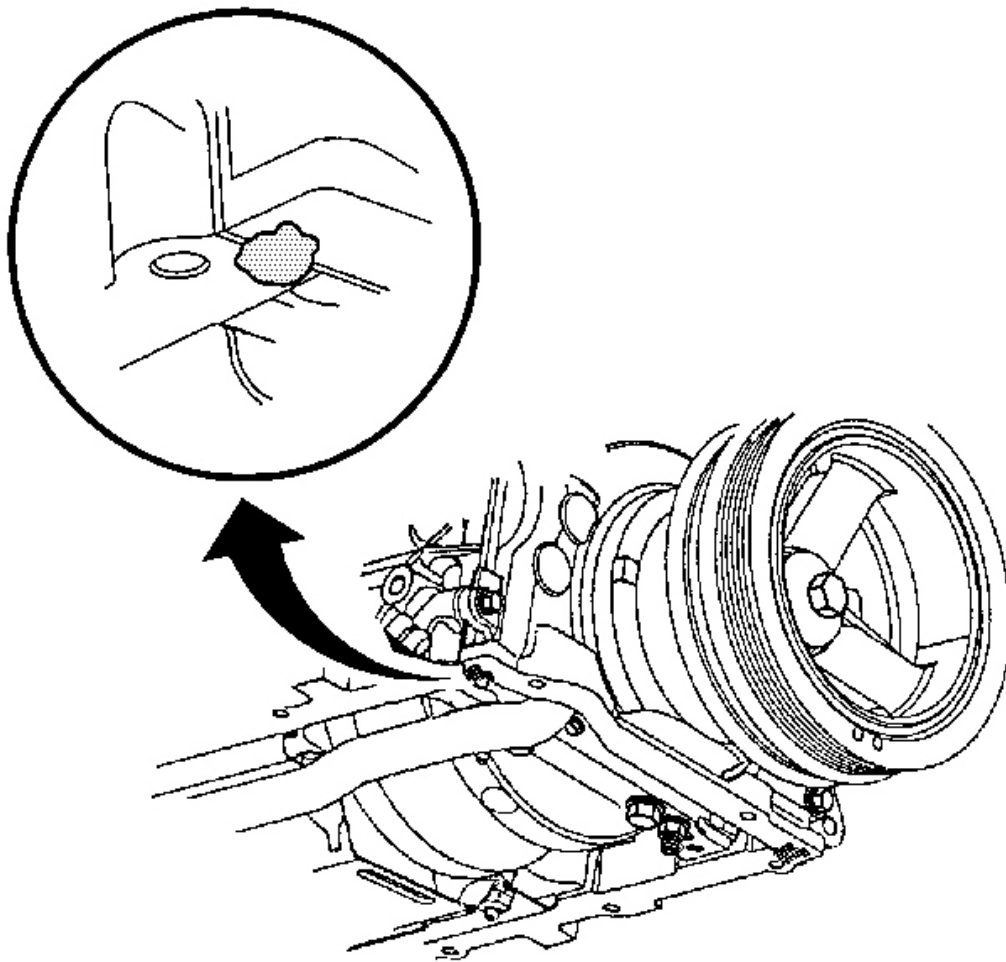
View Of Sealant Applied To Front Oil Pan-To-Engine Block Junction
